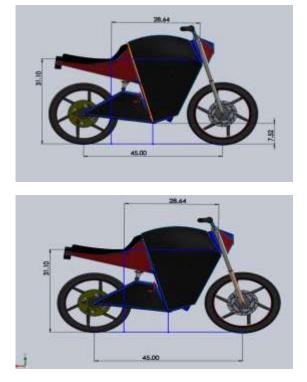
dimensions of electric motorbike all are in inches. 1inch=25.4mm.
